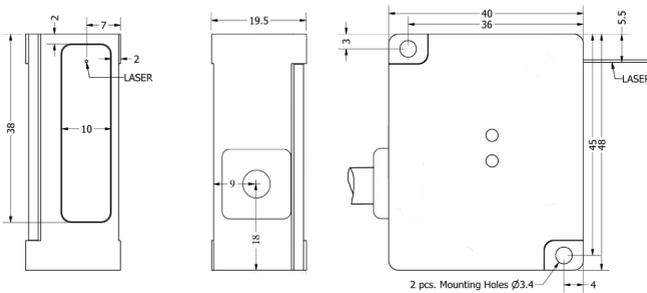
Dimensions, Front, Rear & Upside (Cable Connection).
